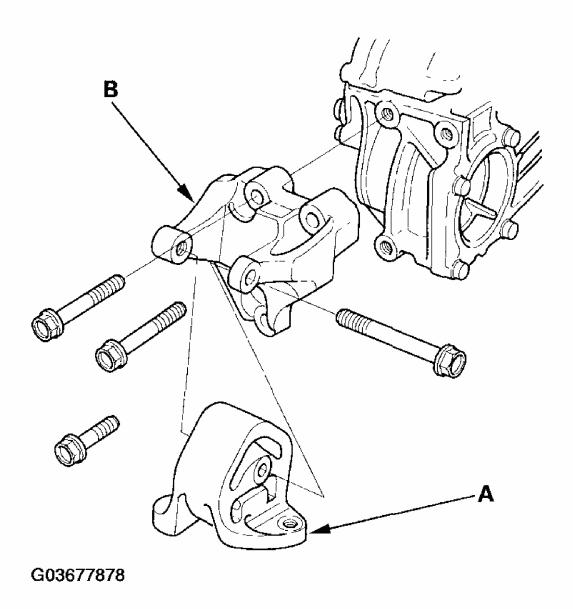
Removing Transmission Rear Mount And Transmission Rear Mount Bracket
